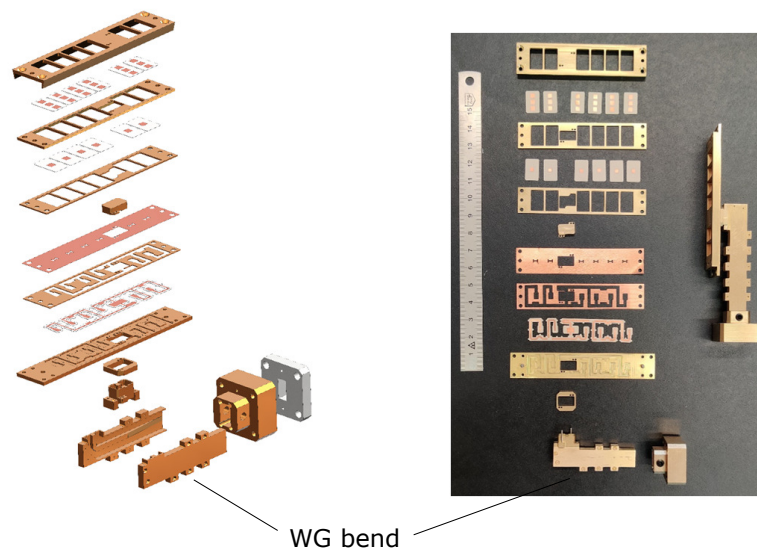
lateral subarrays: (left) exploded view and (right) fabricated parts. Technical drawings detailing the subarray parts are included in the Appendix B.
